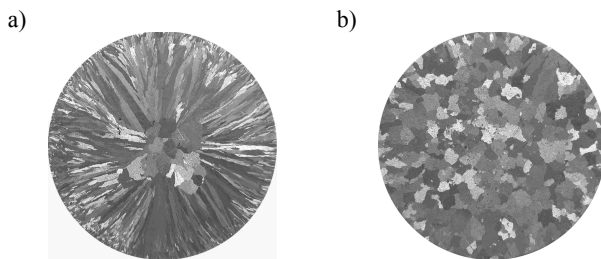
Macrostructure of aluminium ingot cross-section after pouring into: a) graphite mould, b) shell mould
